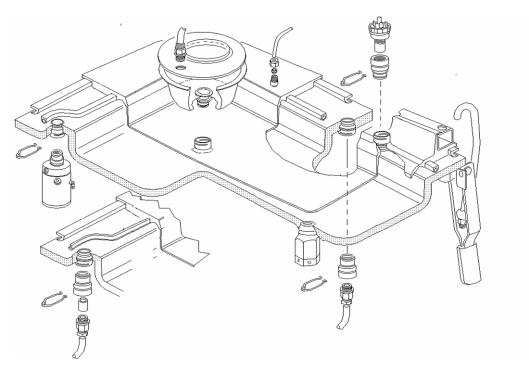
LRTM mould cross-section illustrating the universal insert application.
